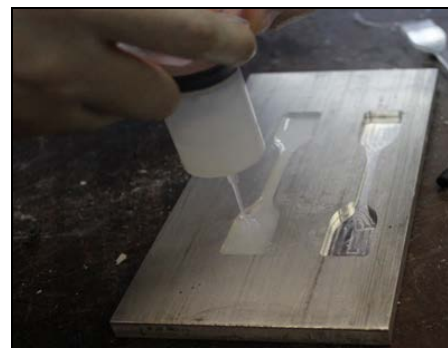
Pour the mixture into ASTM D412 aluminium mould
